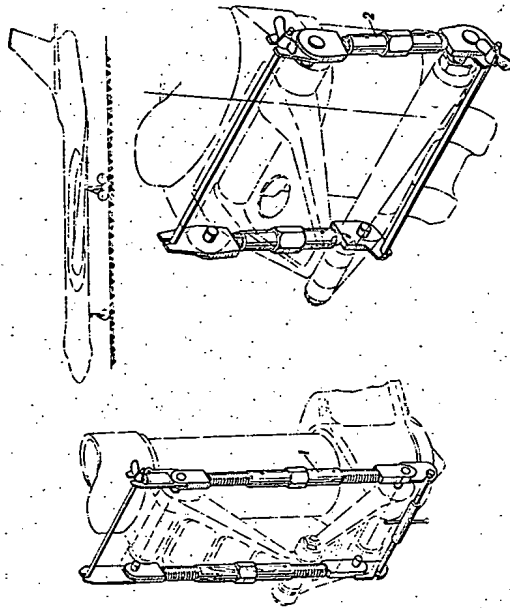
ATTACHMENT OF SCREW CLAMPS TO LANDING GEAR STRUTS.
